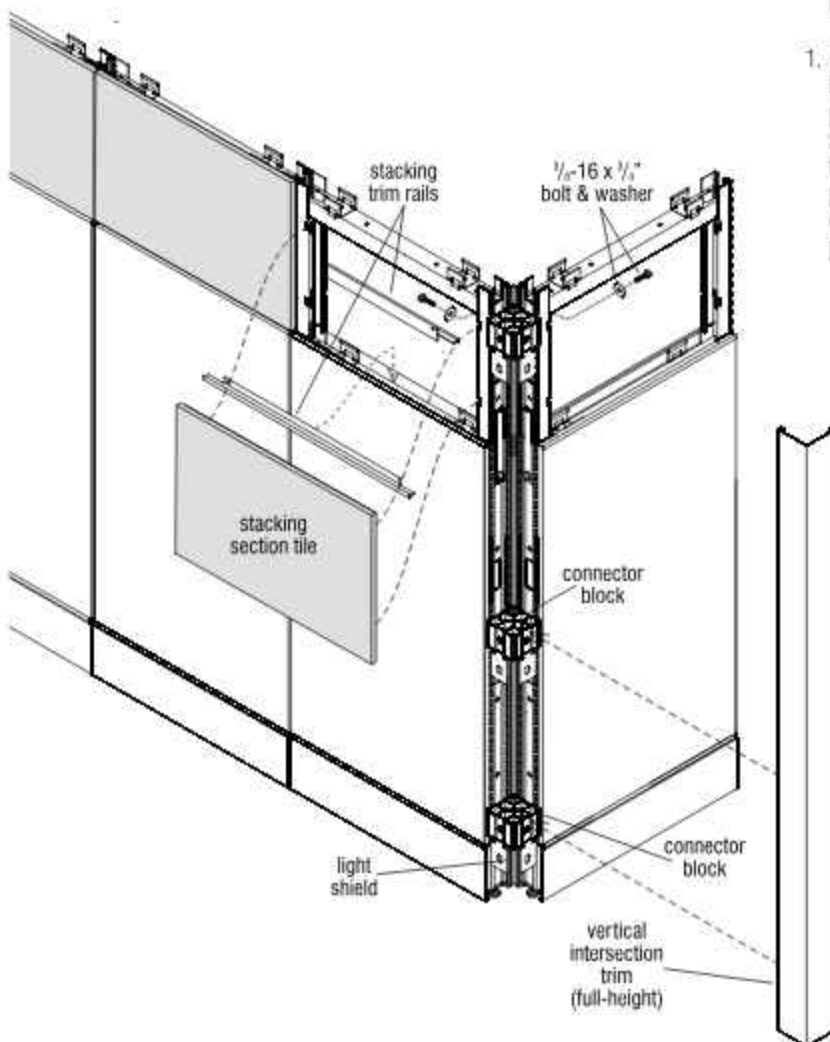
Stacking Sections with Fabric, Markerboard or Slat Wall Tiles (steel frame) - Full-Height Intersection Assembly
